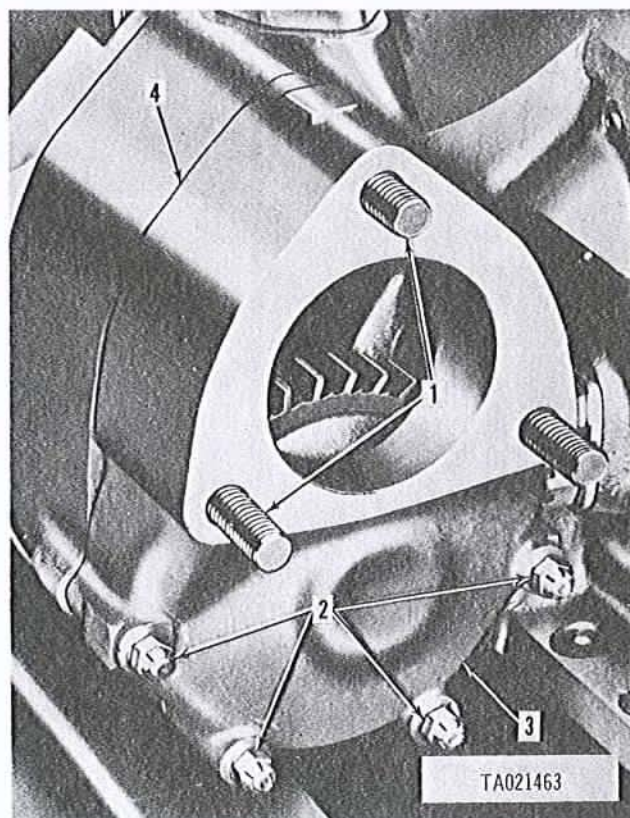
, 1. Removing or installing power take-off spur gearshaft, model AVDS-1790-2DR engine.
